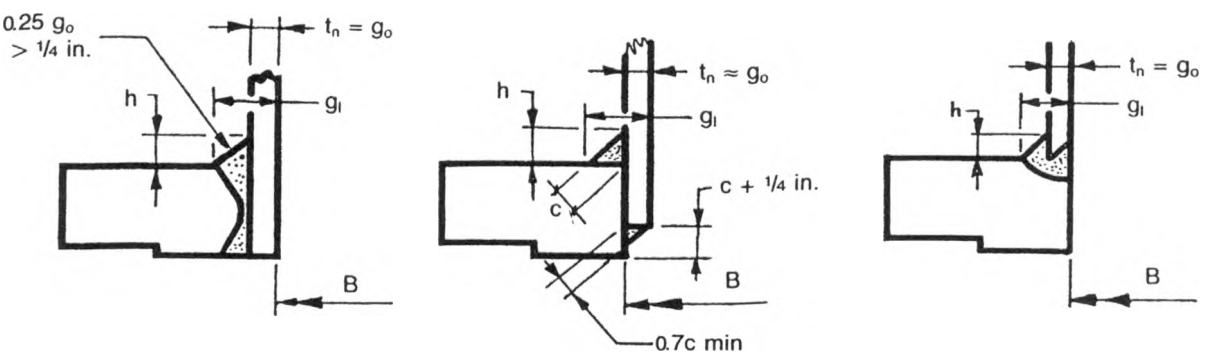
Various attachments of ring flanges. (All other dimensions and loadings per Figure 3-2.)
